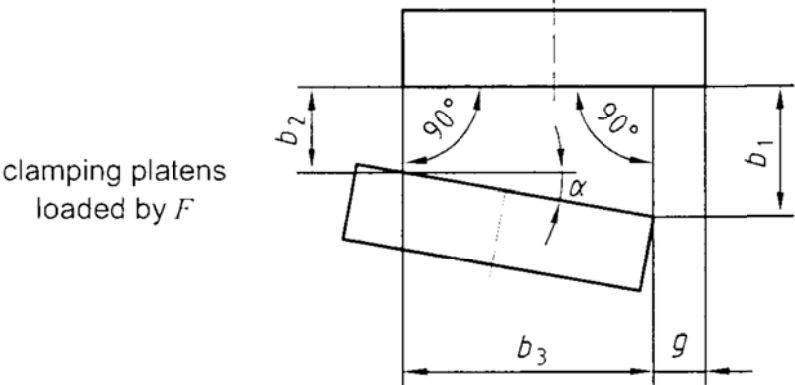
Contact fault in projection welding equipment (ISO 669)
